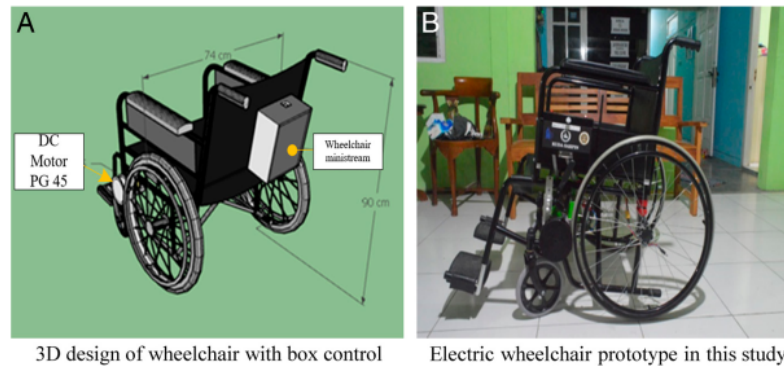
Electric wheelchair Hardware: (a) 3D design, and (b) prototype.
